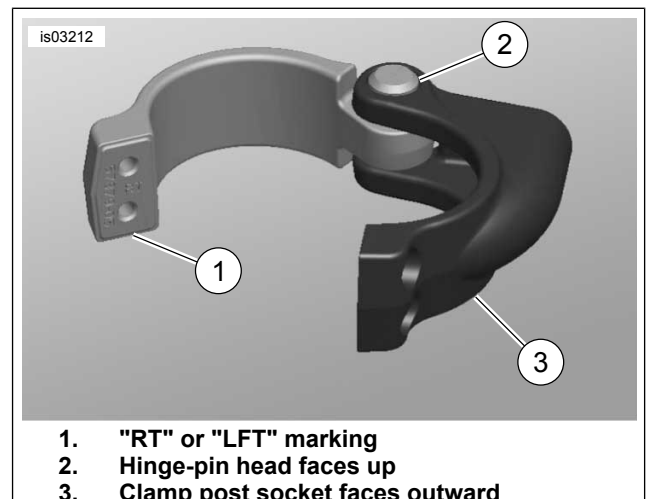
Fork Tube Clamp and Post Identification (Right-Side Clamp Shown)
